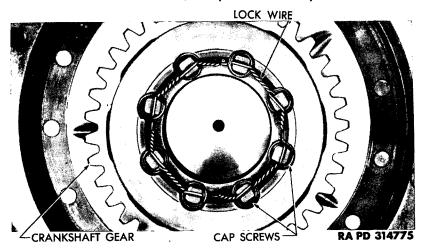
Crankshaft Gear Attaching Cap Screws Secured
